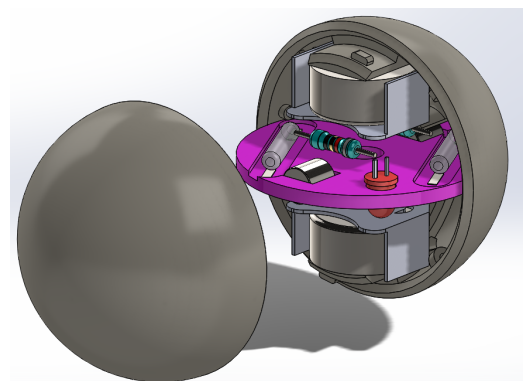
CAD drawing of the PCB mock-up with electronics inside a sphere.
